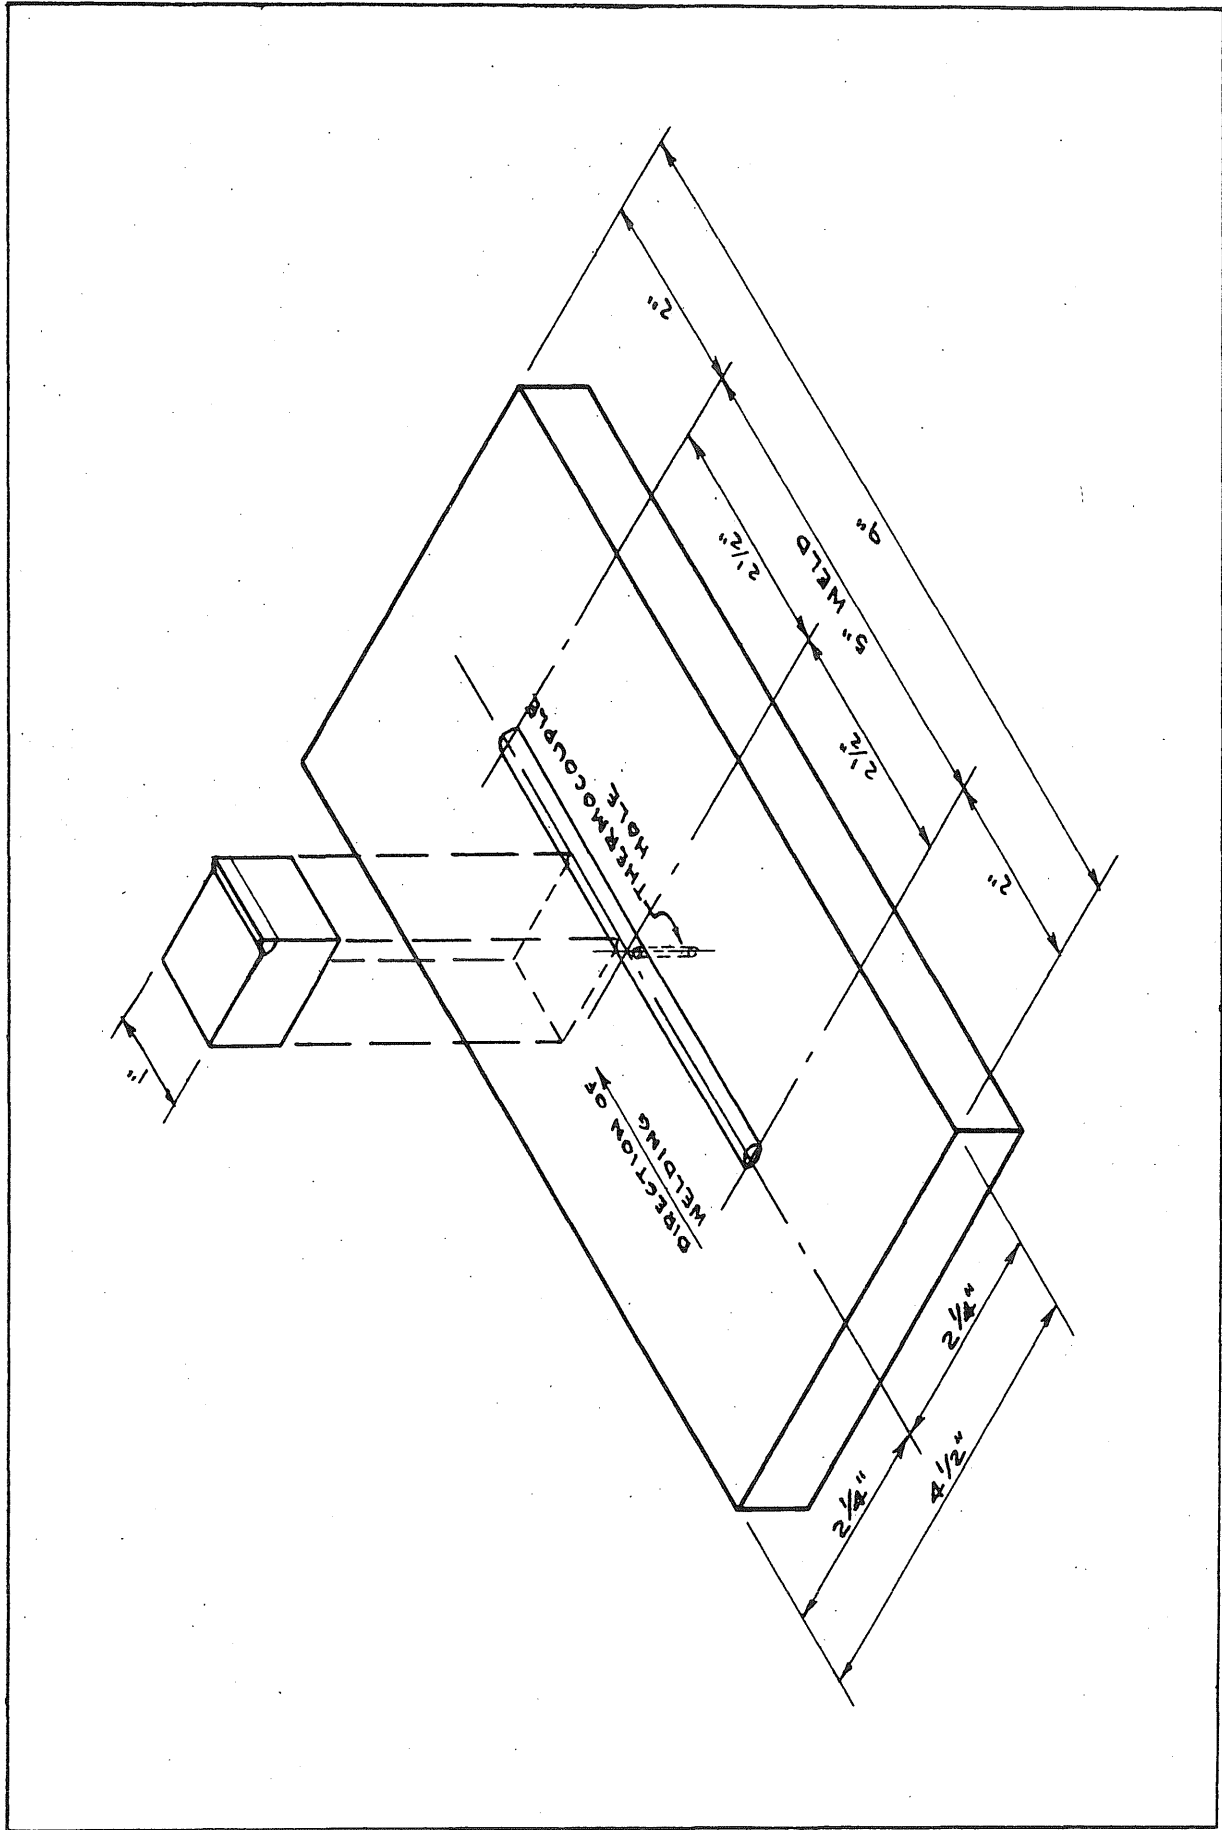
Test Specimen and Section of Weld Examined for Cracking
